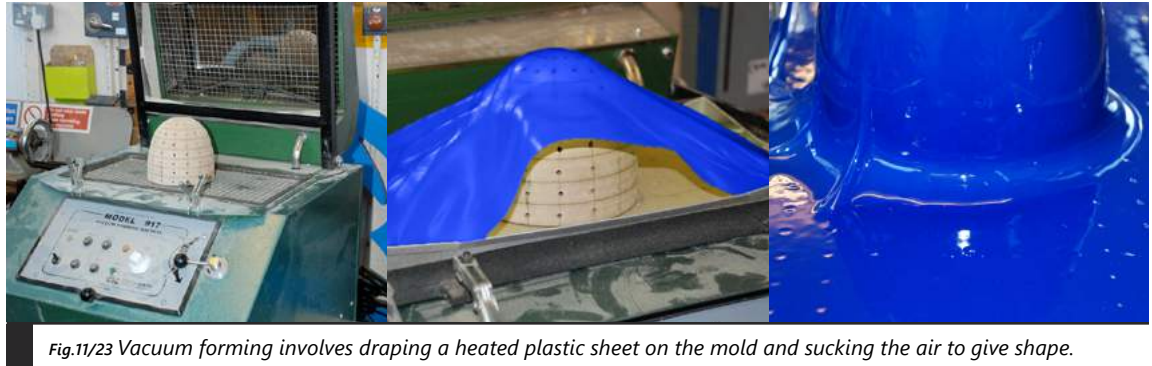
/23 Vacuum forming involves draping a heated plastic sheet on the mold and sucking the air to give shape.
